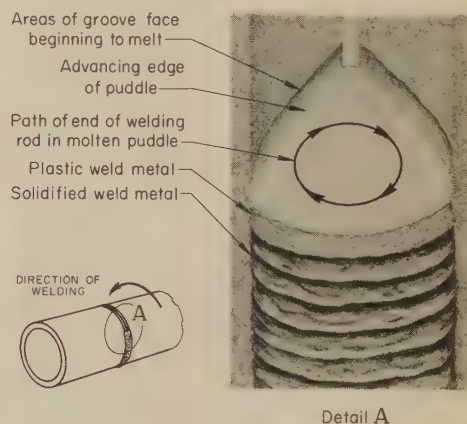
Positions and movements of welding rod in backhand technique used to butt weld pipe in the horizontal-fixed position
